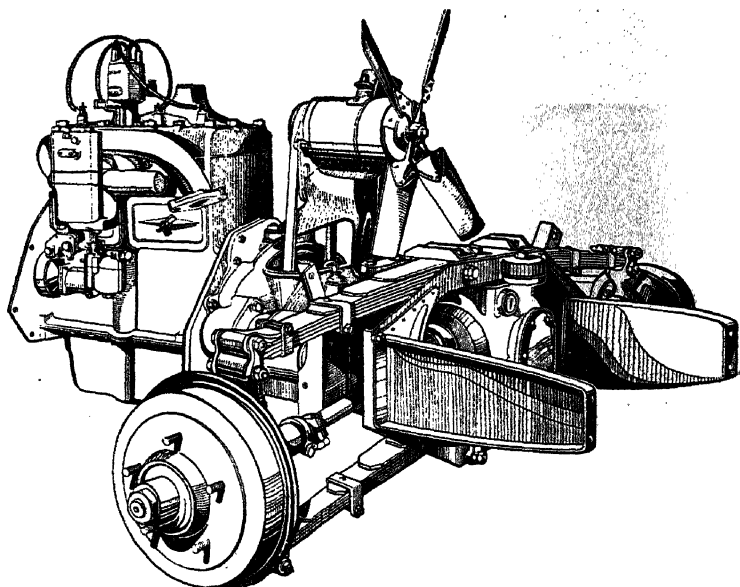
Adler Front Power Unit, Drive and Springing System.
